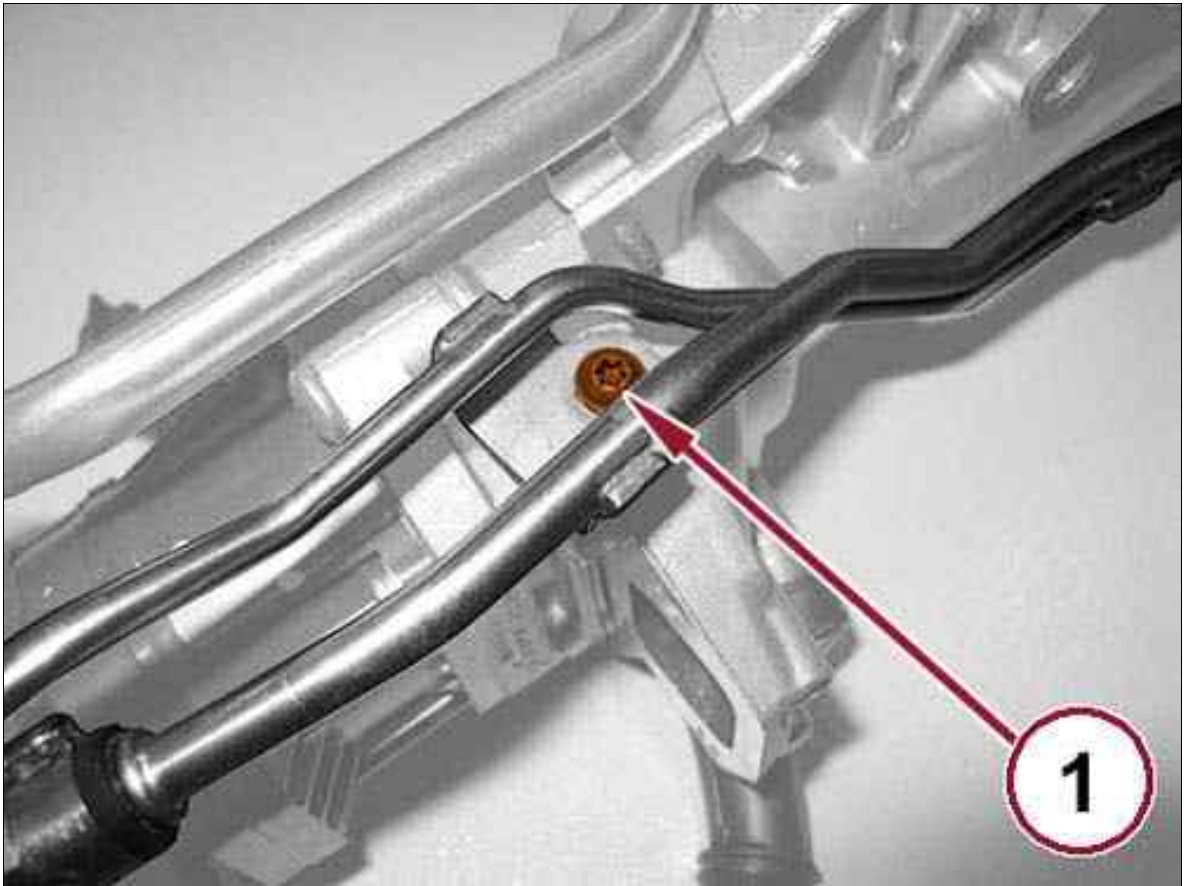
Tandem Pipe To EGR Cooler Retaining Screw
